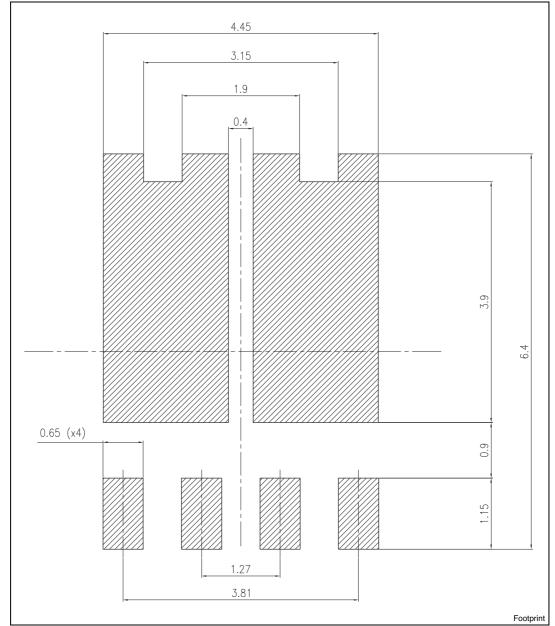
PowerFLAT™ 5x6 double island type R-A drawing recommended footprint (dimensions are in mm)
